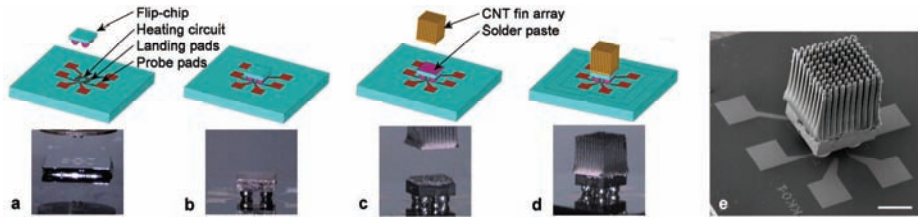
Phases of substrate flip-chip/CNT-cooler assembling. (a) Positioning and (b) soldering the flip-chip on the Cu landing pads of the. (c) Solder paste dispensing, CNT array positioning and (d) soldering on the Cu coated back-side of the chip. (e) FESEM image of an assembled structure (scale bar 500 μm).¹
